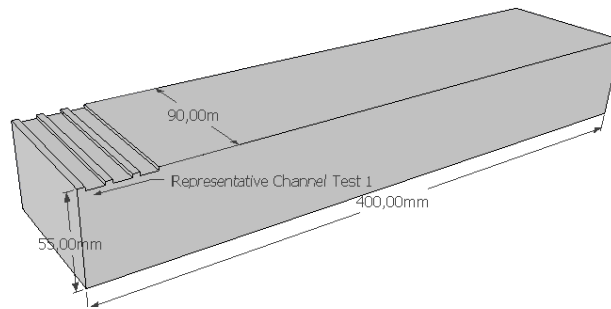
Dimensions of the workpiece of ABNT 1045 steel
